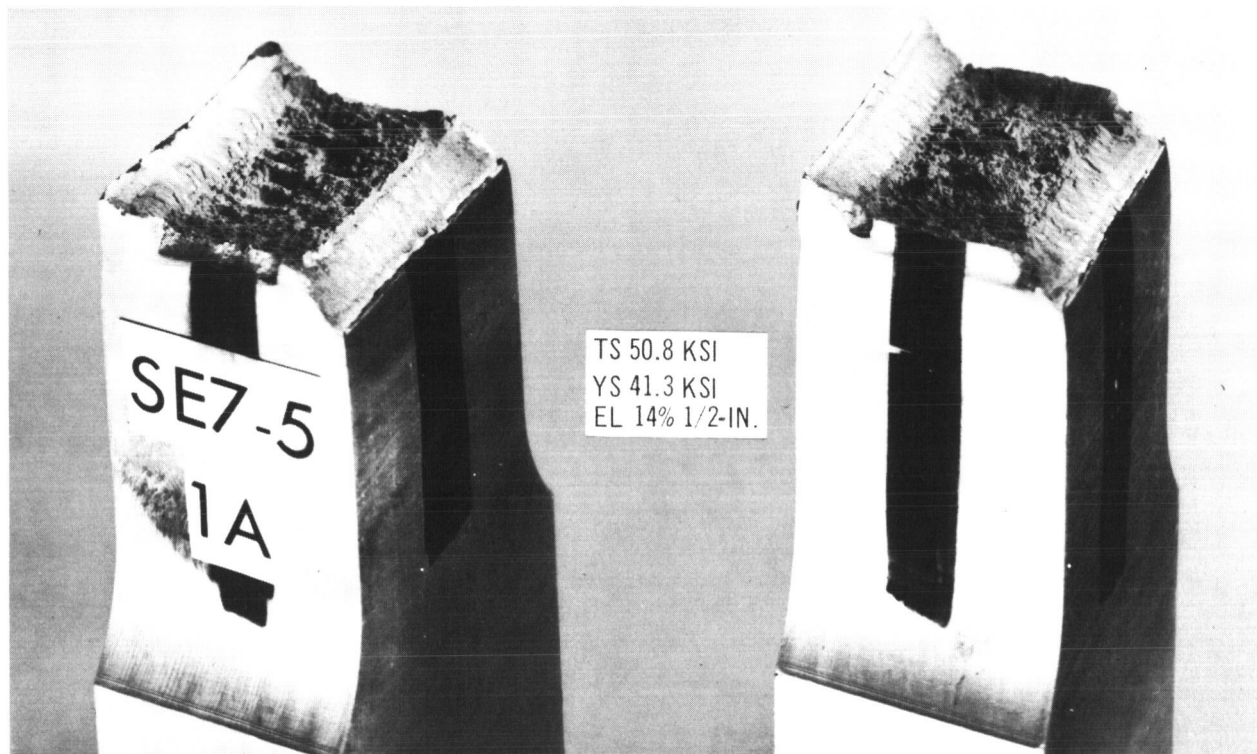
FRACTURED FULL THICKNESS TENSILE SPECIMEN IN 1-1/4-IN. THICK EB WELDED 2219 PLATE.
